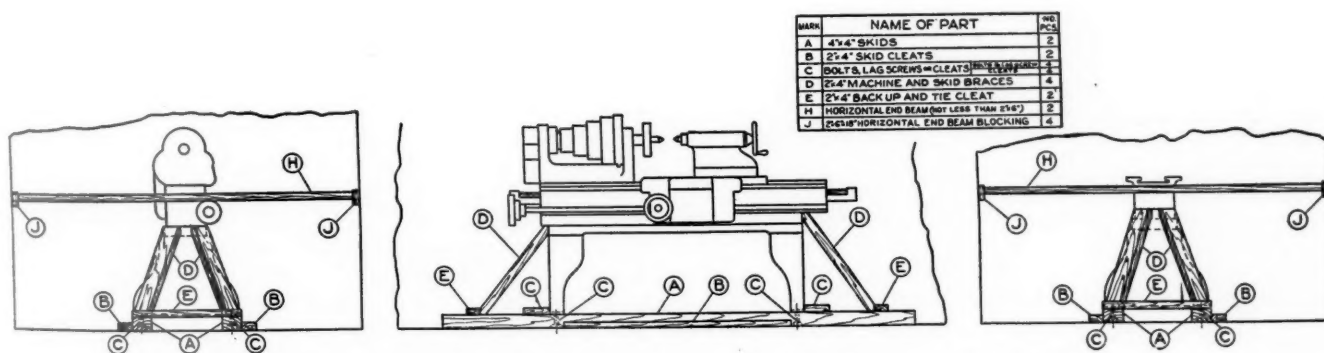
B—Manner of loading light and heavy machinery in box, gondola, or flat cars
